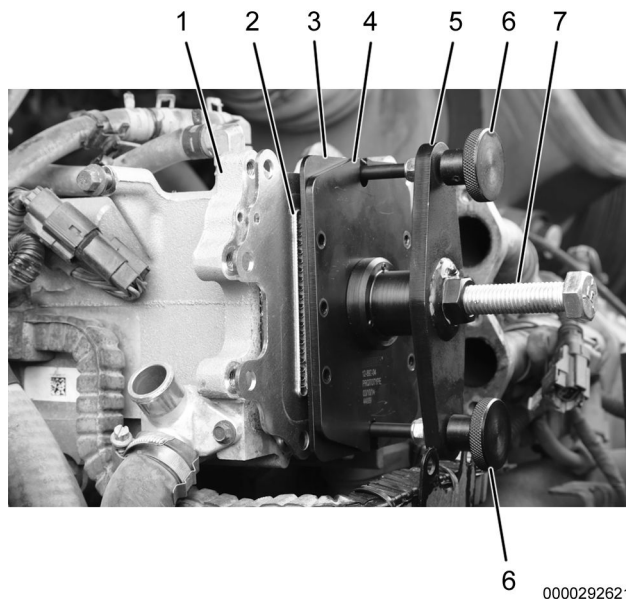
LT EGR Core Puller Thumbscrews – LT EGR Cooler Core Removal.
